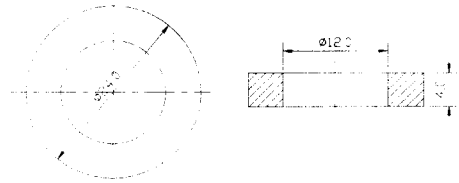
Dimensions of ring compression test specimen (unit : mm)
